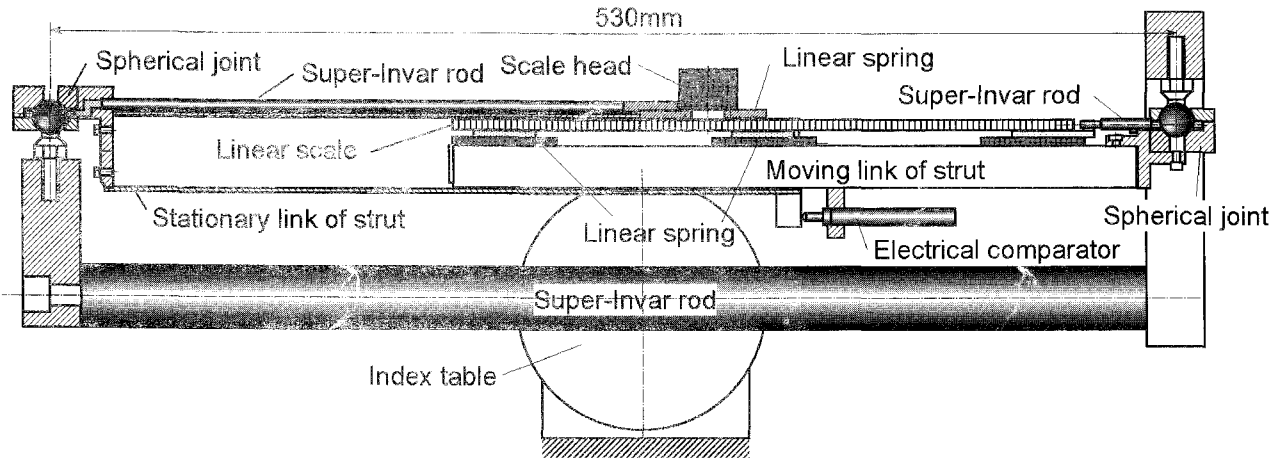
Experimental setup for testing the strut with improved spherical joints
